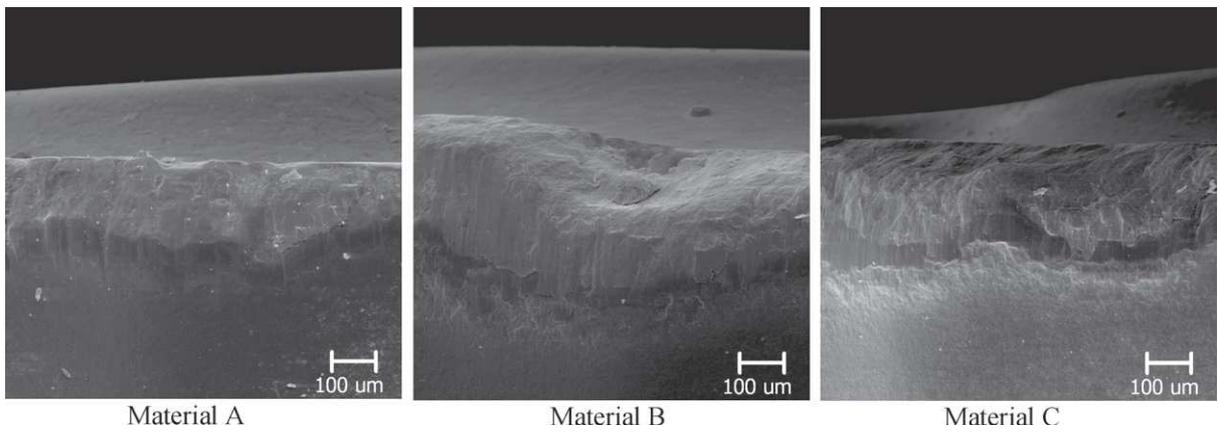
Tool flank wear at cutting speed of 800 m/min.
